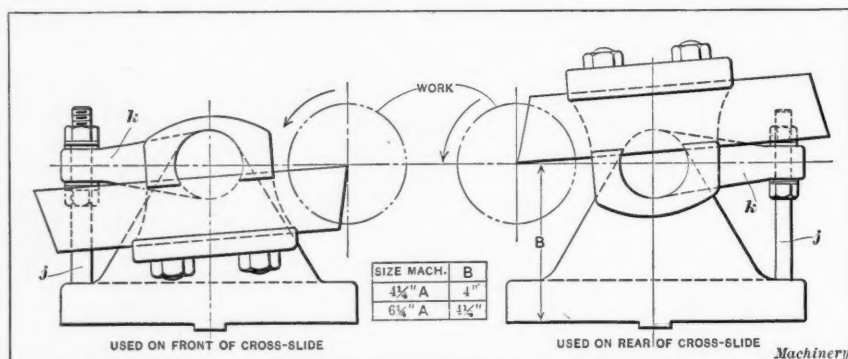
Two Possible Combinations of the Universal Cut-off Tool-holder shown in Fig. 4
